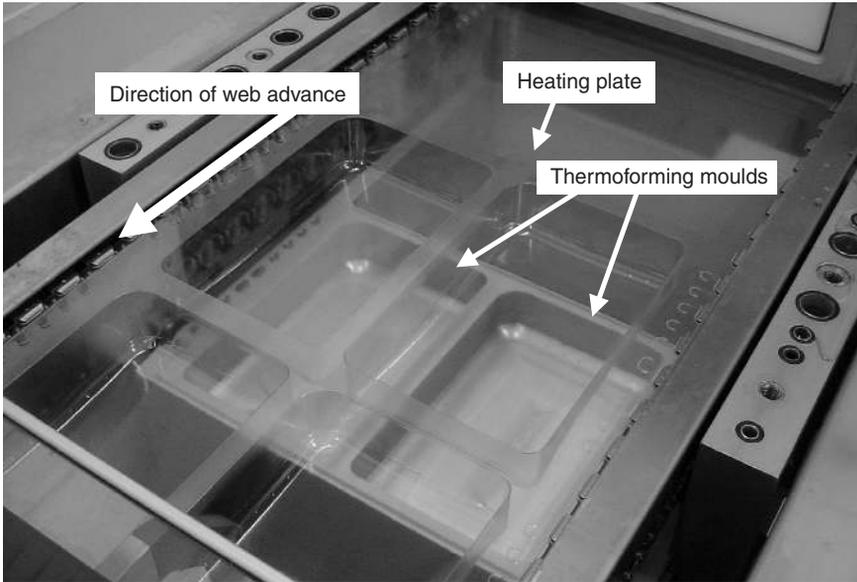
Base web thermoforming section on thermoform fill seal machine. (Courtesy of Multivac.)
